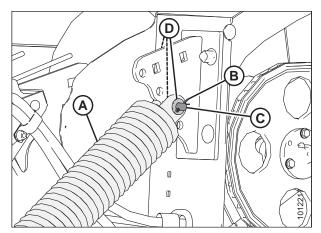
Left Side Spring Float Assembly Shown – Right Side Opposite
